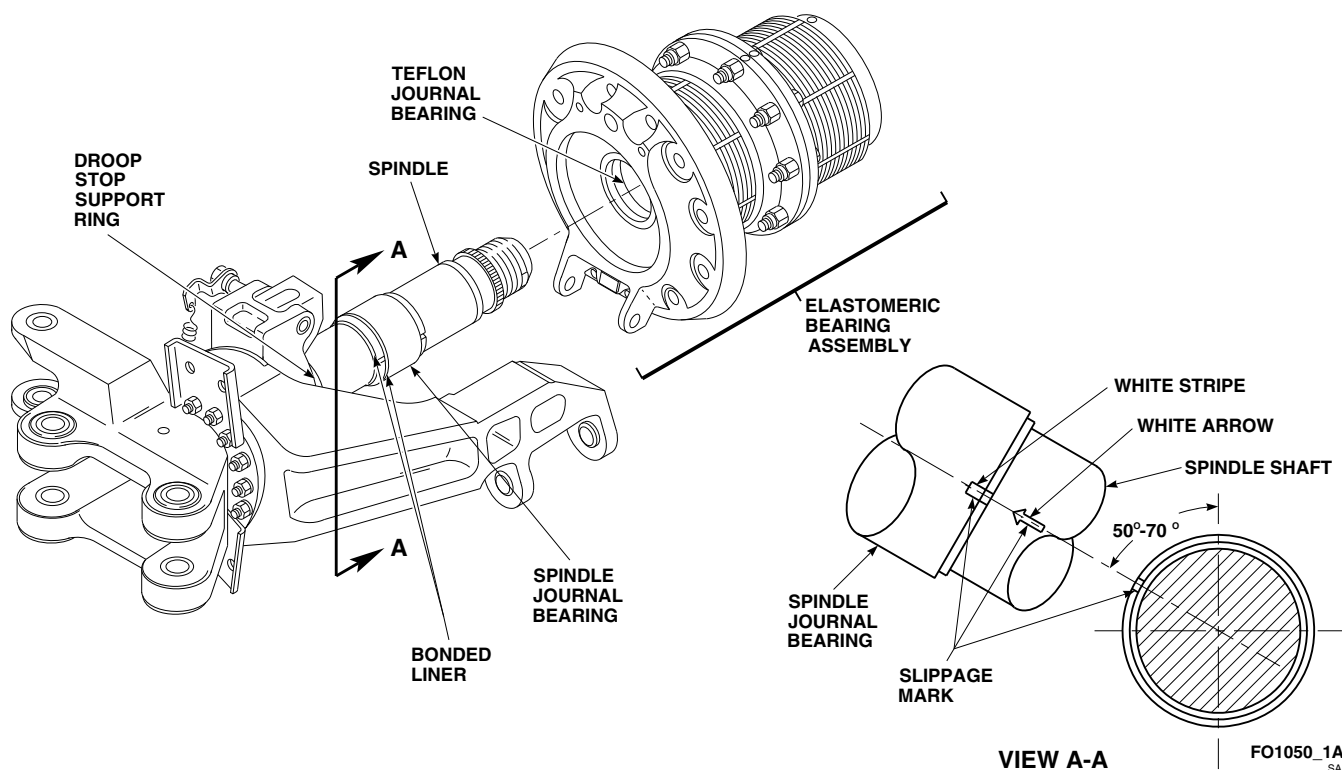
INSPECT JOURNAL BEARINGS (SHEET 1 OF 3)
